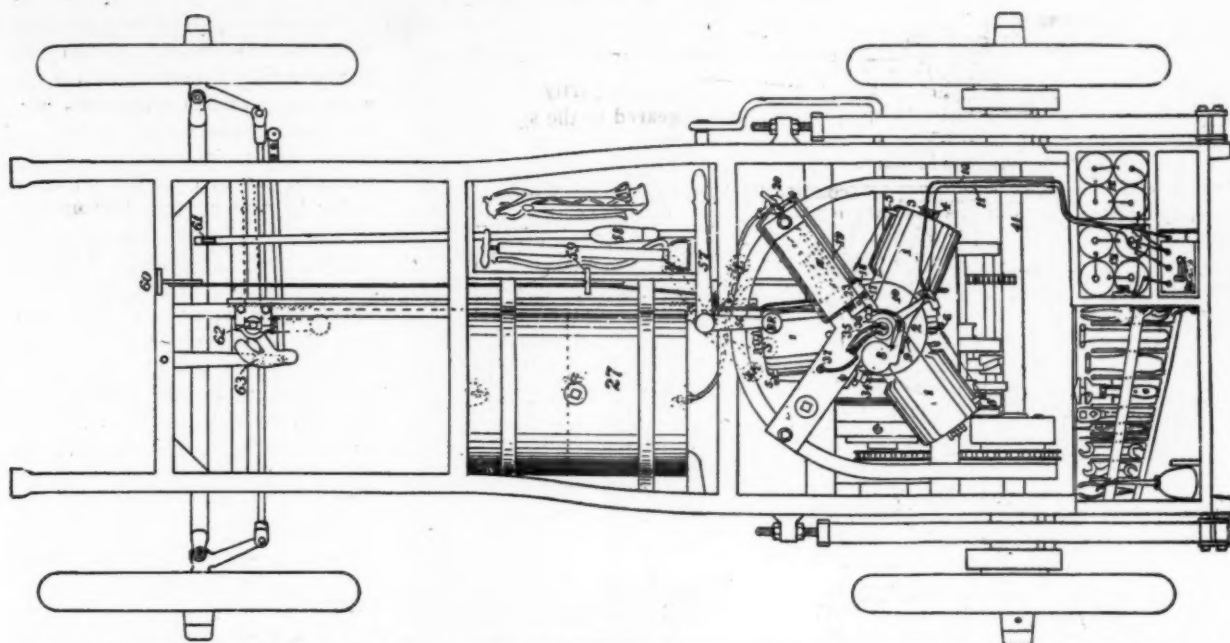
CHASSIS OF ADAMS-FARWELL CAR, SHOWING HORIZONTAL DISPOSITION OF ROTATING MOTOR UNDER REAR SEAT.
